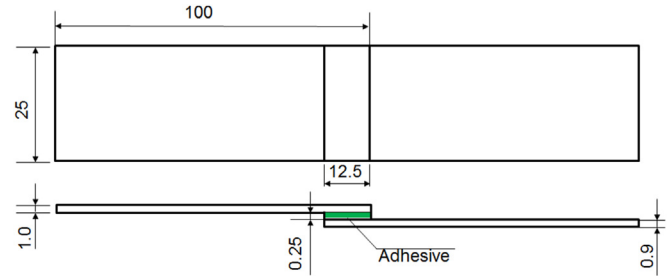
Configuration of adhesive-bonded lap-shear joint (dimensions in mm).
